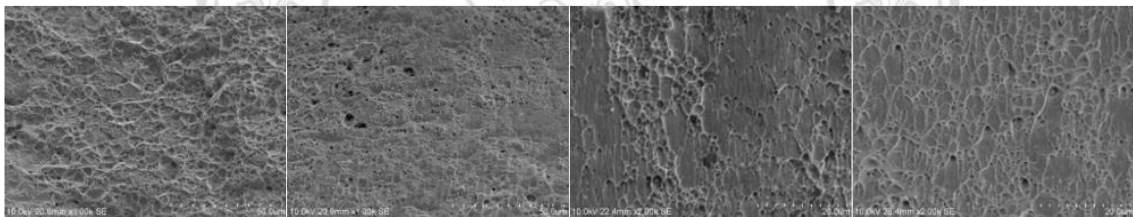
Examples of fracture surface of the base metals and PCGTAW weldment at welding current 130 and 160 A under Ar:N₂ = 95:5
